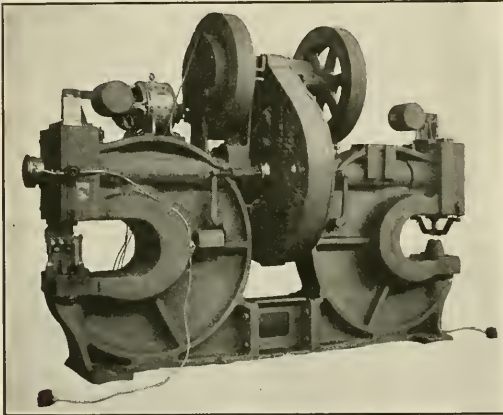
Double End Motor-Driven Punching and Shearing Machine Arranged with Electrical Control
